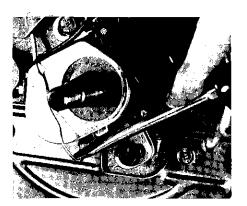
Pry the bottom of the retaining spring open with a screwdriver and move the spring (wire) out of the way.
